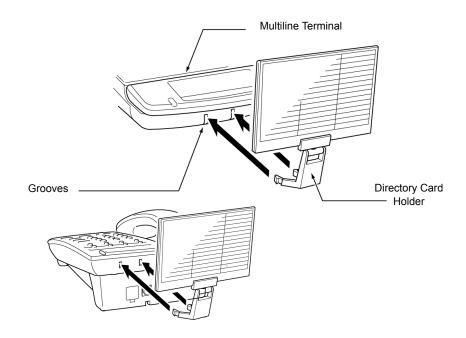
Attaching Directory Card Holder to the Multiline Terminal
